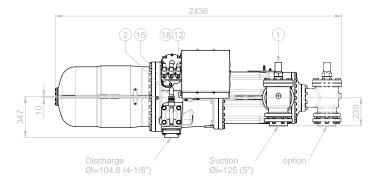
DIMENSIONS PER ES3-L240/L270/L300 (MSI061)
